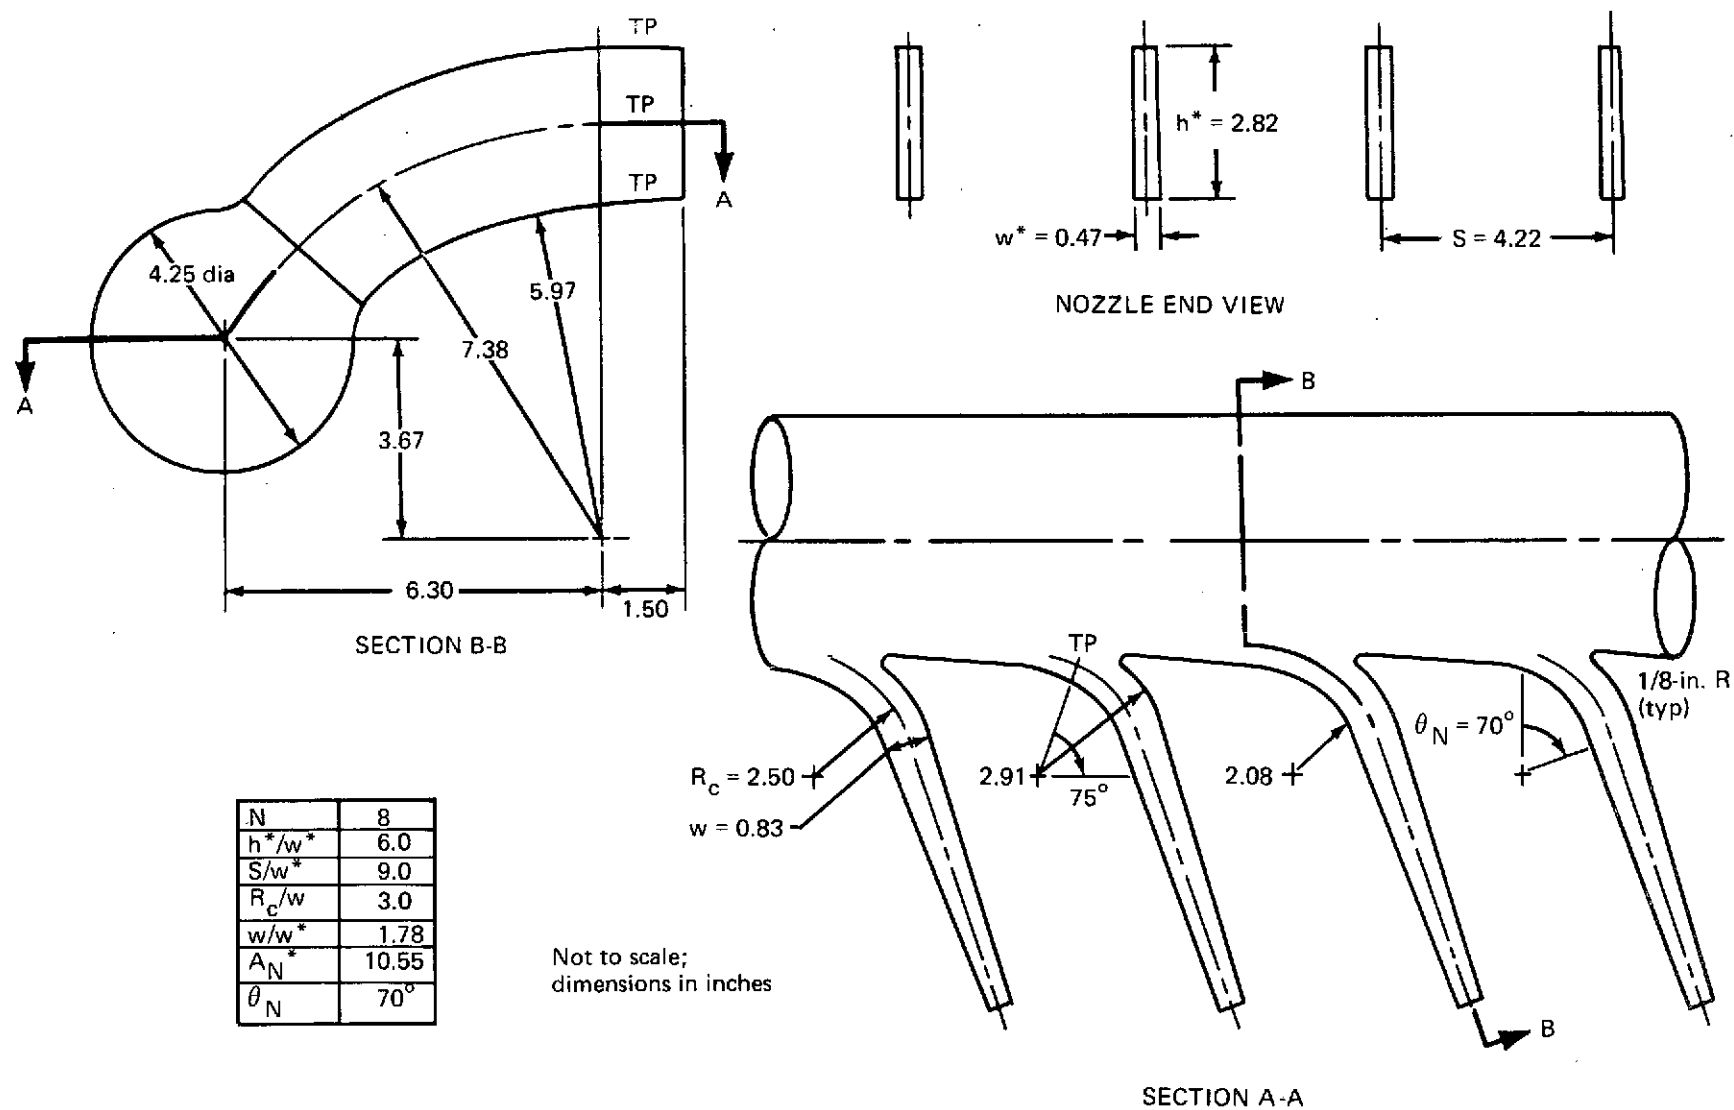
WING-DUCT-LOBE NOZZLE ASSEMBLY DNA-4 DESIGN DETAILS
